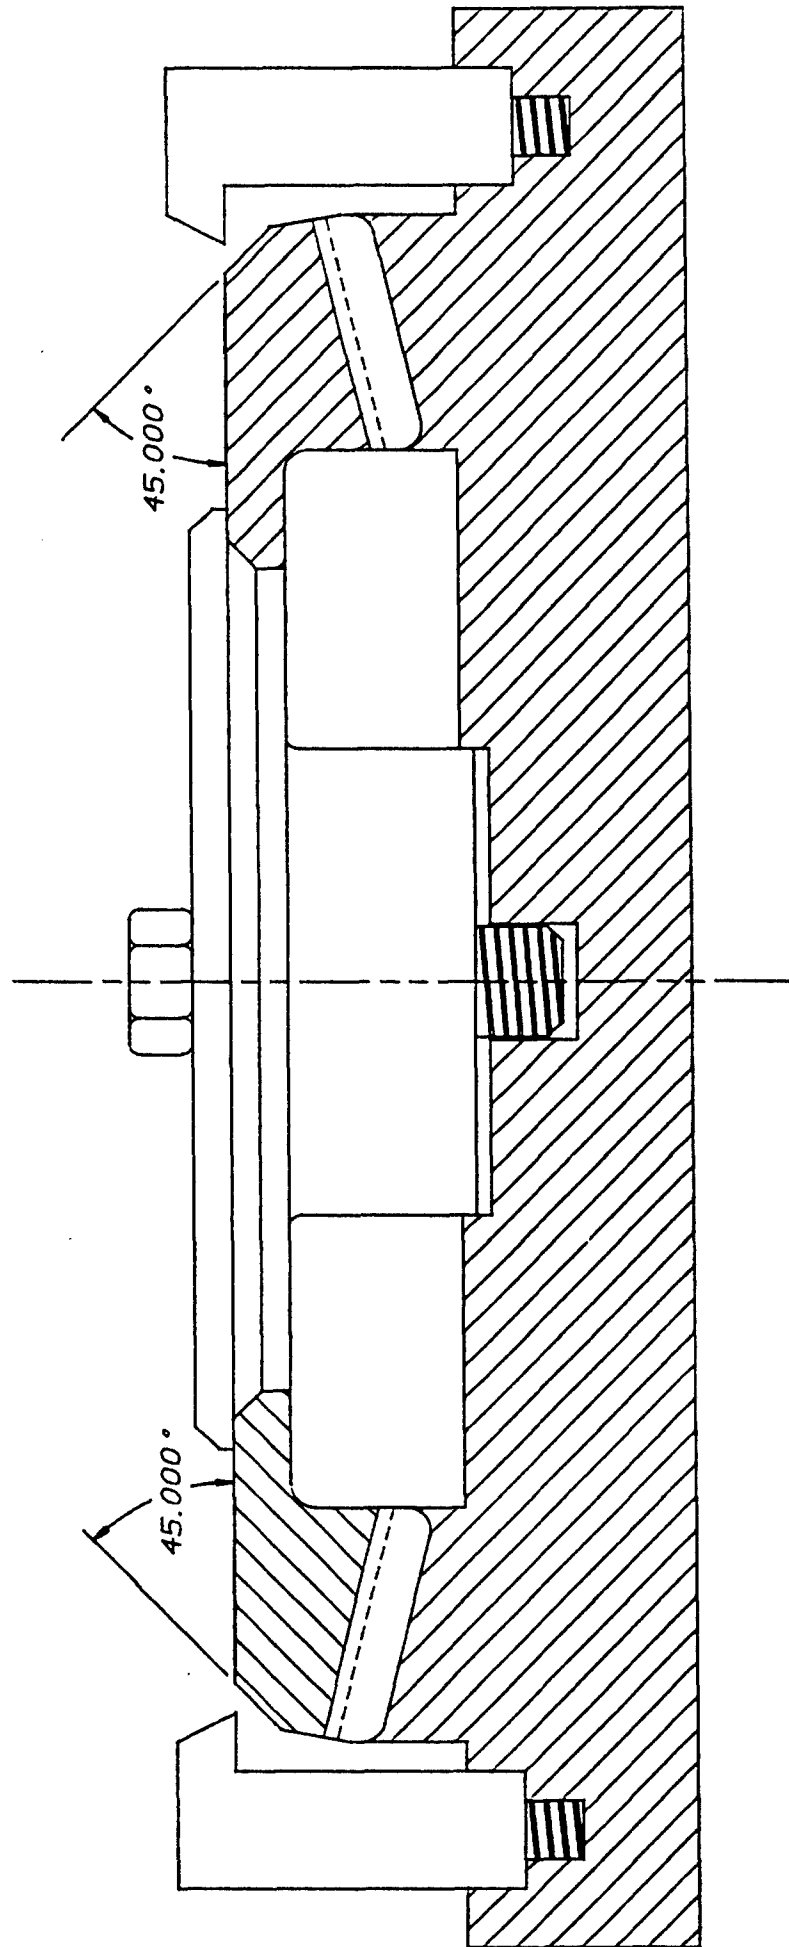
Clamping Arrangement of the Nest, used for Machining the Back Side of Forged Gears
